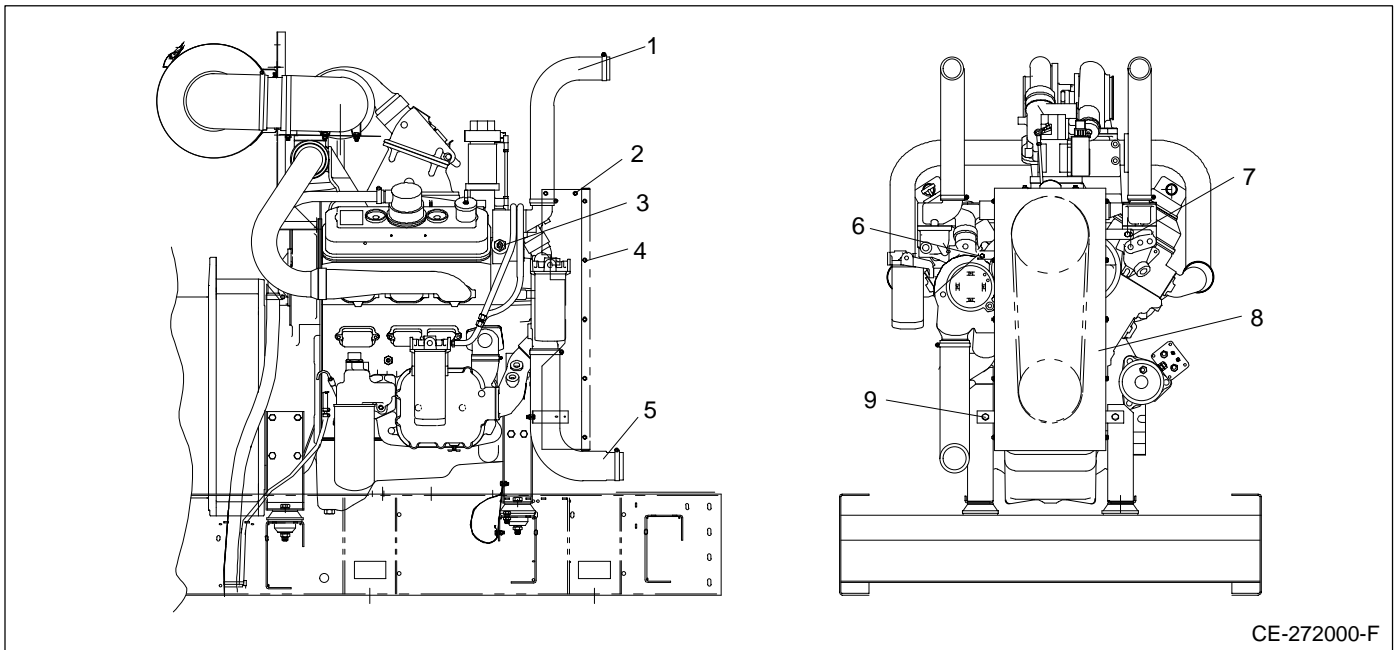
135/150ROZJ Remote Radiator Setup Kit
